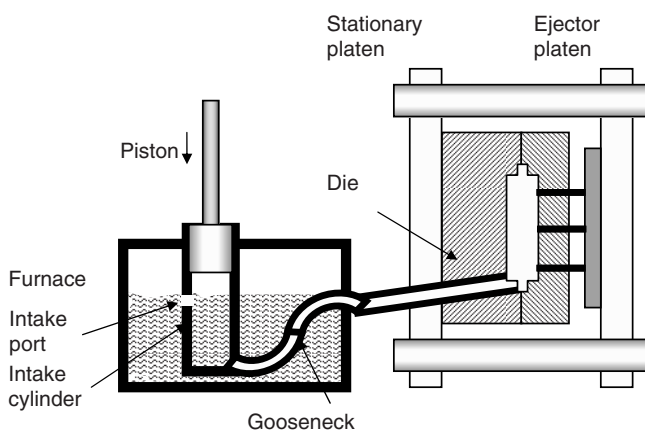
The graphical illustration of a hot chamber die-casting machine
